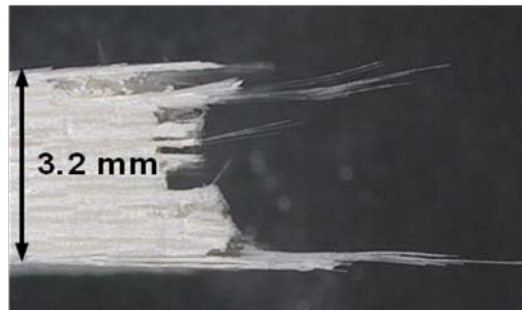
Fracture surface of the N720/AM specimen(2) tested in tension to failure with constant loading rate of 0.0025MPa at 1100°C in steam (side view).
